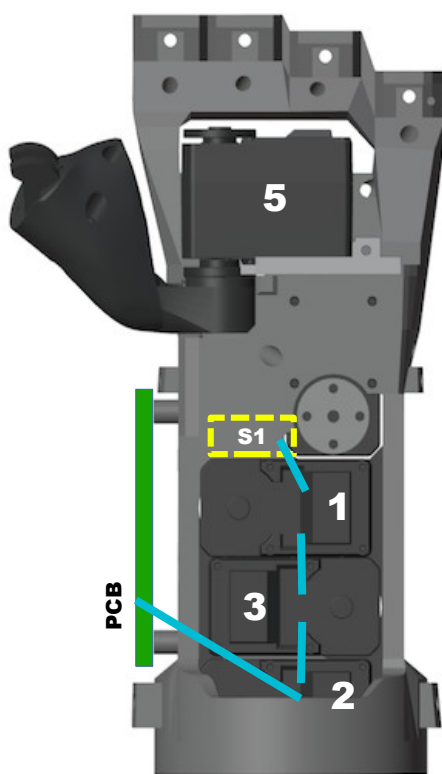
Front view. ID Servomotors, logic board PCB and cavity S1 e cavita S1
